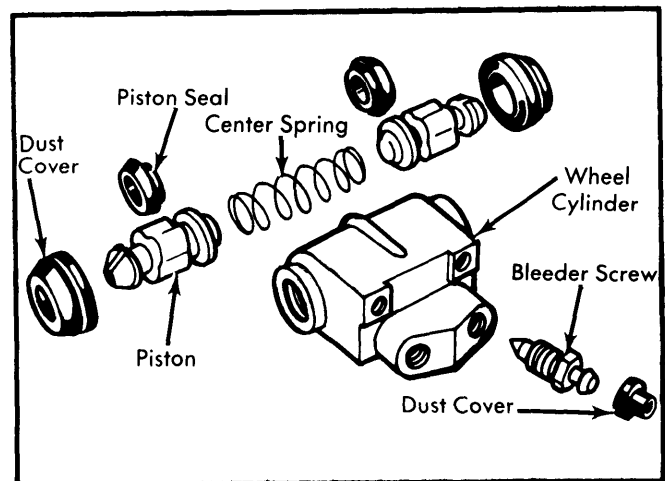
Expanded View of Rear Wheel Cylinder Assy.
